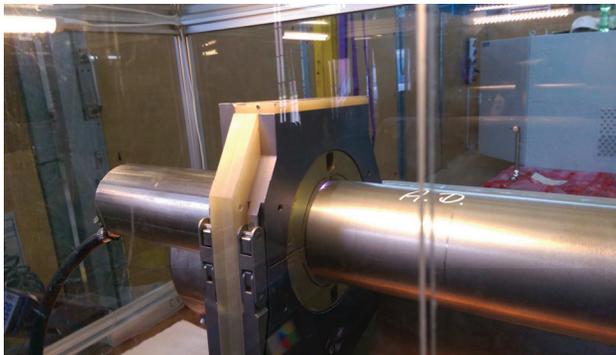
Helium service pipe during orbital welding (weld arc on top of tube).
